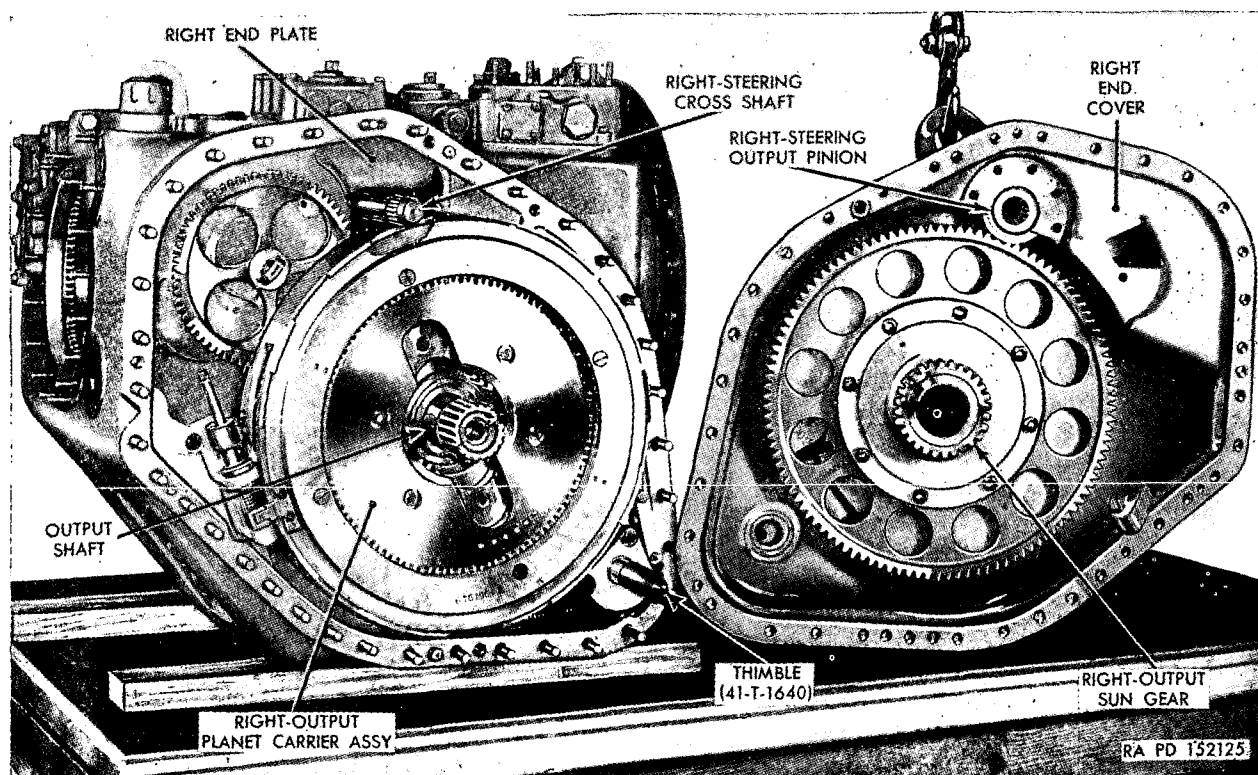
Oil-seal thimble installed on right brake-apply shaft.
